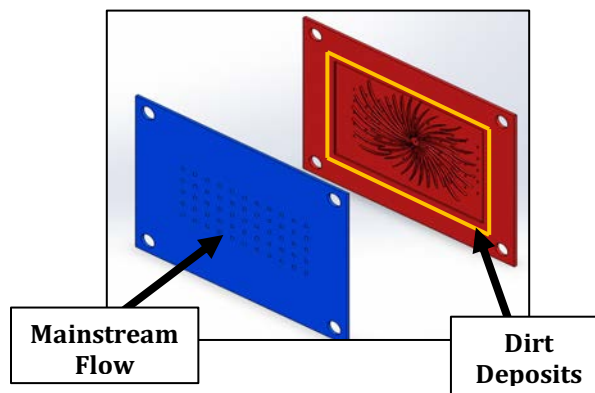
Dirt deposition location (orange) relative to the coupon assembly.
